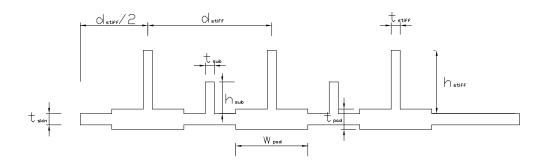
Straight Stiffened Plate with Sub Stiffeners and Pads under Stiffeners
